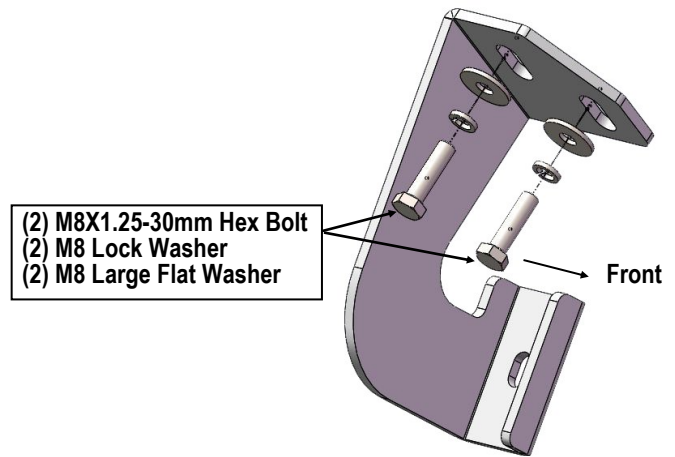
Driver Front Mounting Bracket (DFM) Installed
